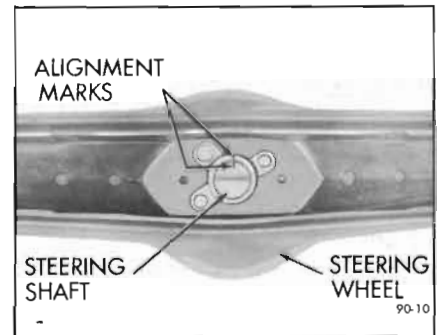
Steering Wheel and Shaft Alignment Marks
